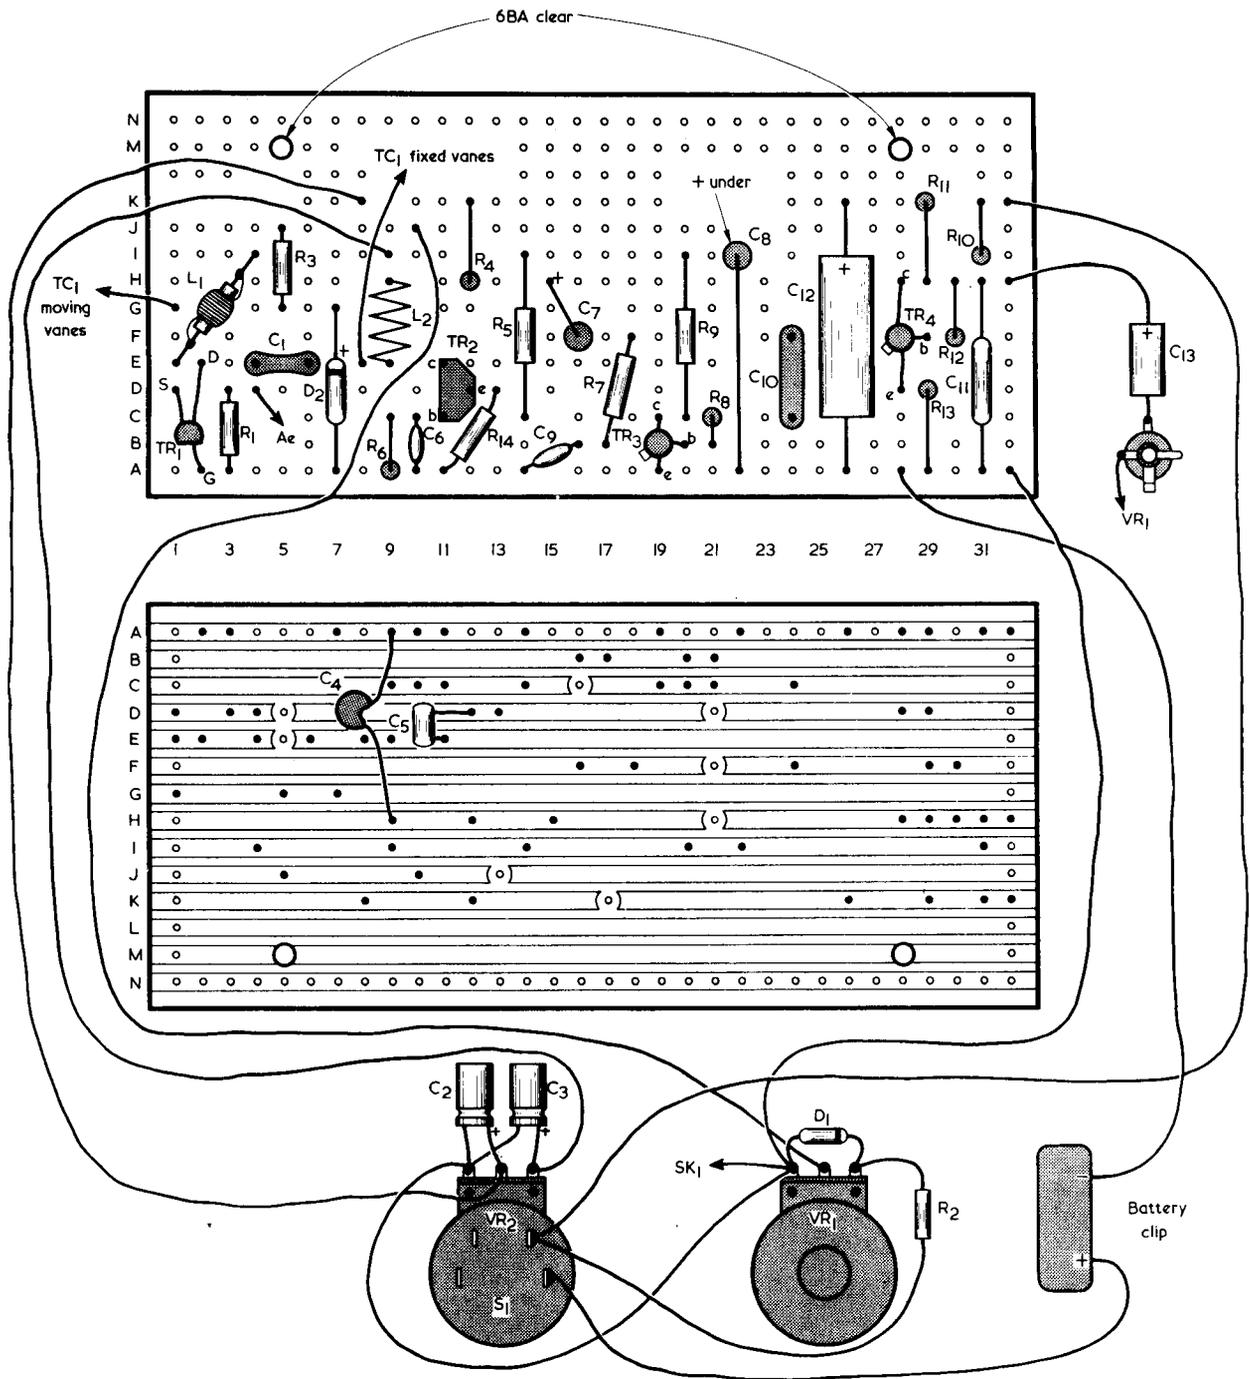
The wiring of the receiver. Nearly all the parts are assembled on the Veroboard panel
